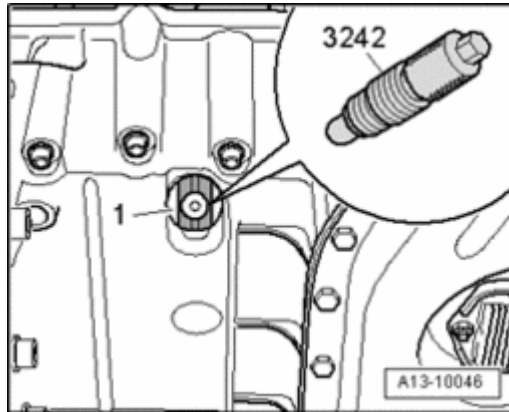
Installing/Removing Crankshaft Holder 3242 In Bore
